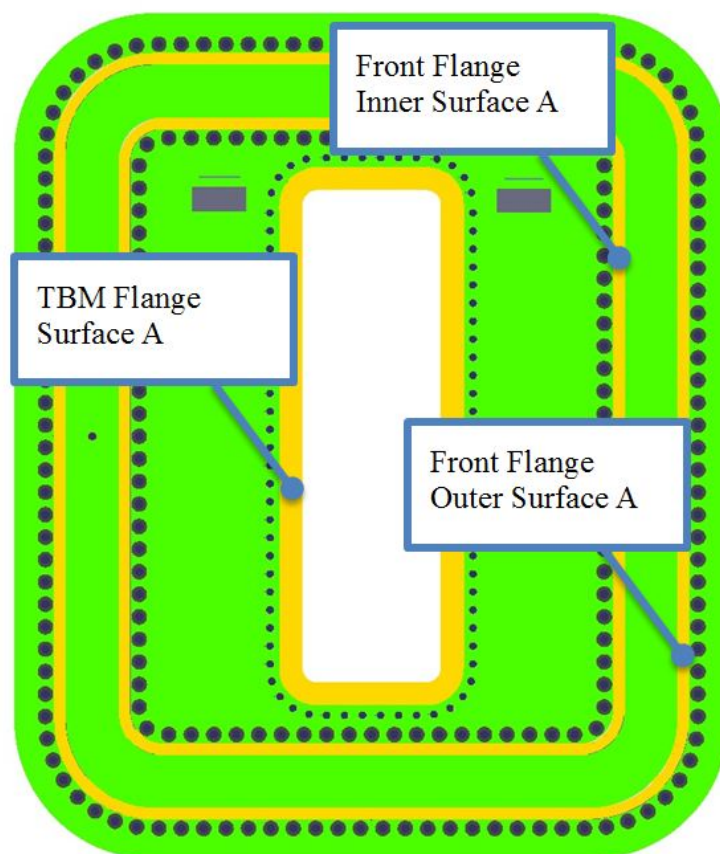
Back Plate Critical Vacuum Seal Surfaces A – Marked in Yellow on Front View of Back Plate. Green =Surface B
